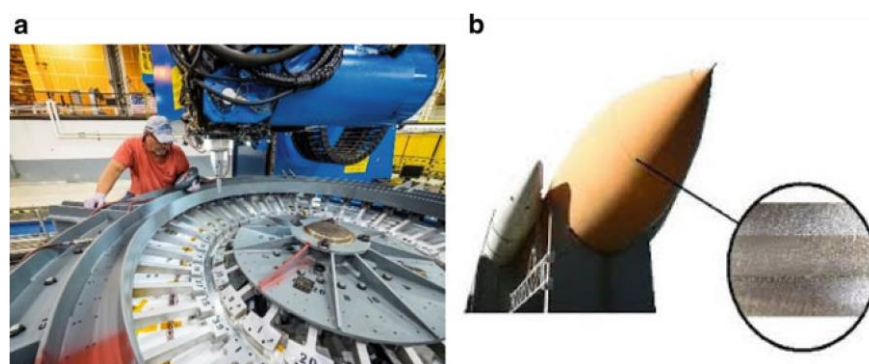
(a) “FS Weld of Orion EM-1 Crew Module”, (b) “FSW on fuel tank of Space-rocket” [164]
